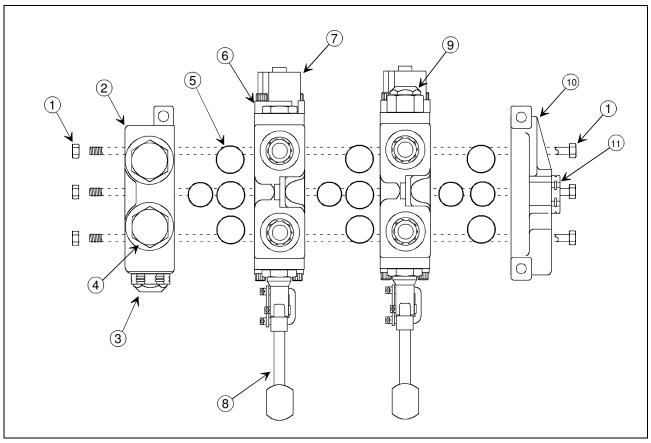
Model V20 Directional Control Valve – Typical Main Assembly
